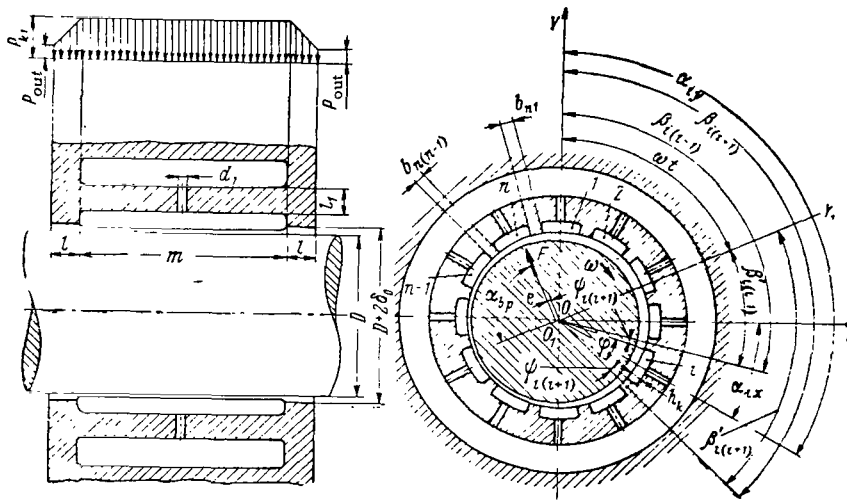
Schematic drawing of a hydrostatic bearing with communicating chambers.
